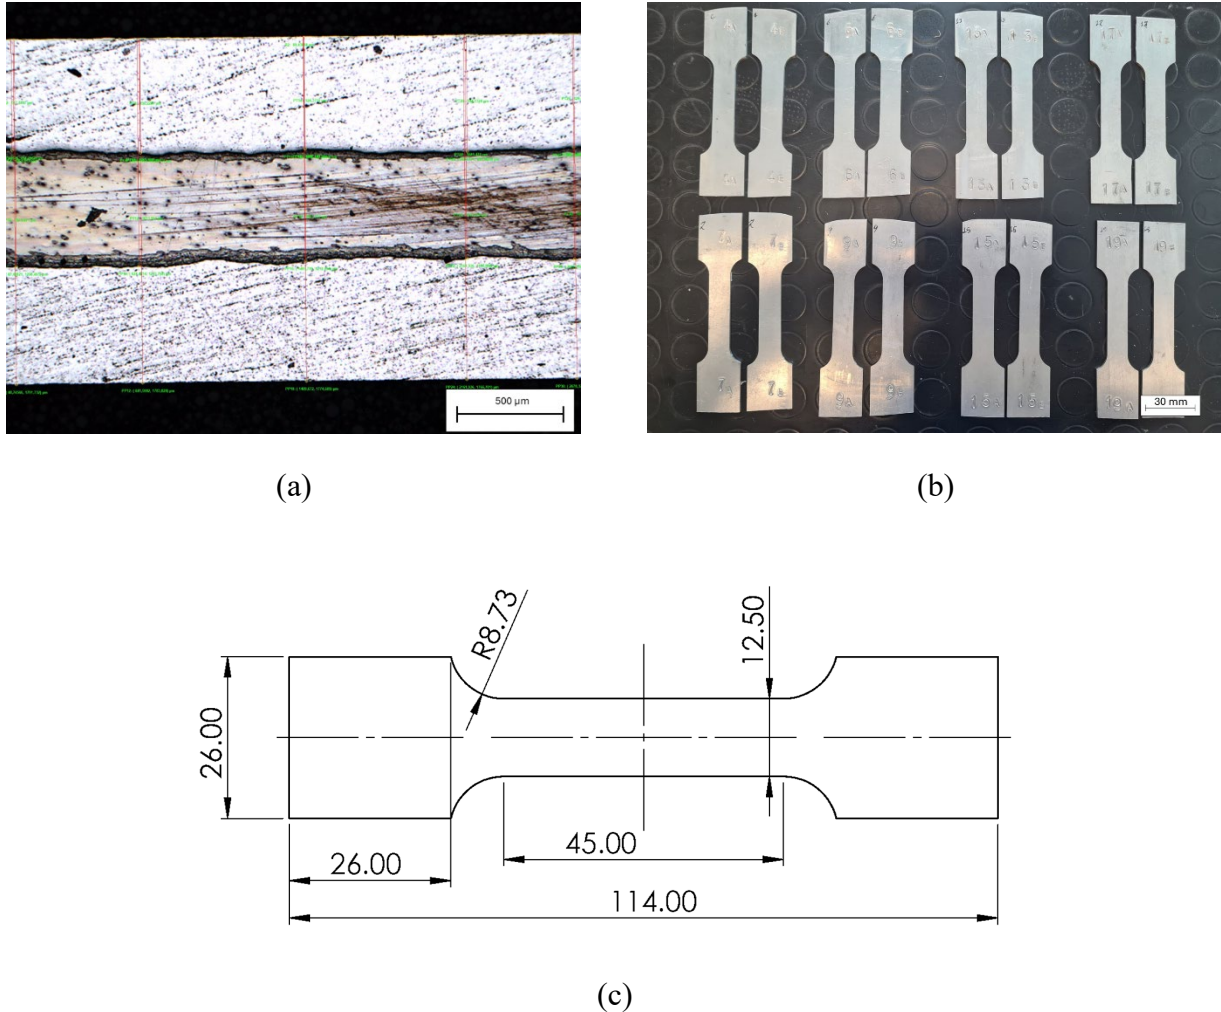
(a) Cross-sectional image of a representative sample showing multiple thickness measurements of each layer, with the rolling direction aligned with the scale bar; (b) photograph of the specimens after machining, prior to mechanical testing; and (c) geometry and main dimensions of the dog-bone specimen.
